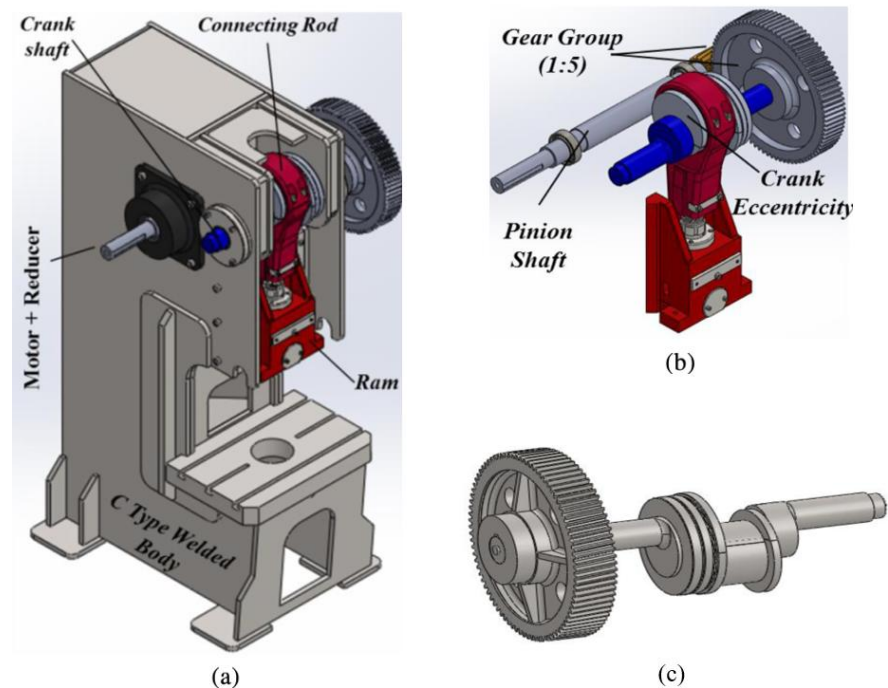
Solid model of the press: (a) complete assembly, (b) transmission mechanism, (c) solid CAD model of the crank assembly [34].
